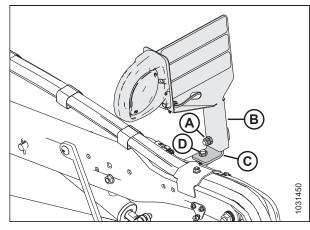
Right Light Assembly in Shipping Position – D1XL Headers
